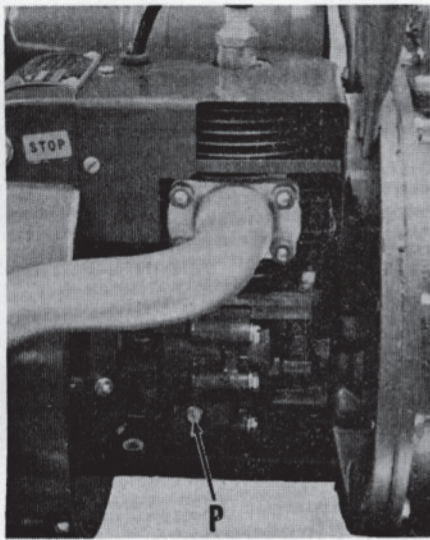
On engine model 20, governor adjusting screw (see Fig. HL45) is accessible after removing slotted head plug (P).
